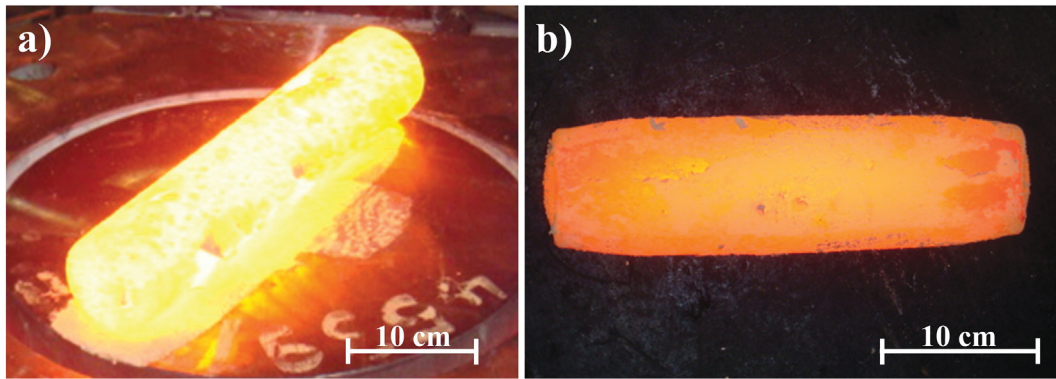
Near conventional hot-die forging of TNM alloys: a) billet prior to forging, b) forged ciabatta.
